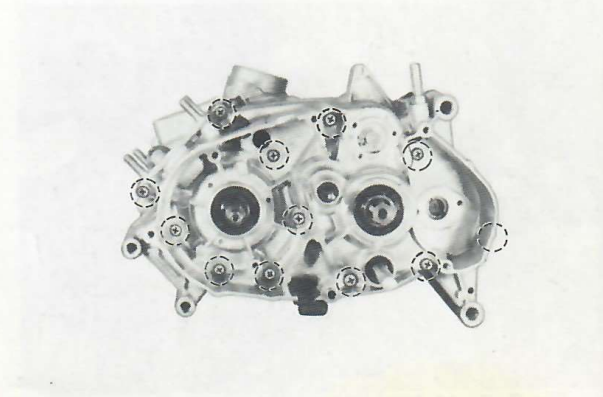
Loosening left crankcase fitting screws with cross head screw driver
